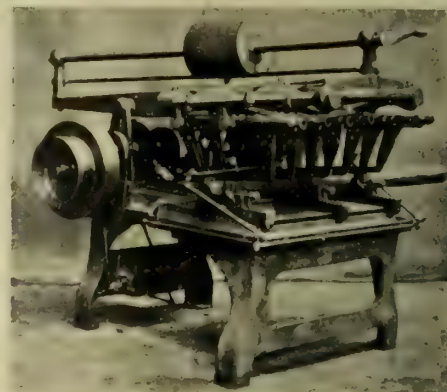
7-IN. MULTIPLE SAW FOR CUTTING BLANKS FROM  $\frac{3}{4}$  IN. THICK UP TO THE CAPACITY OF THE MACHINE.
